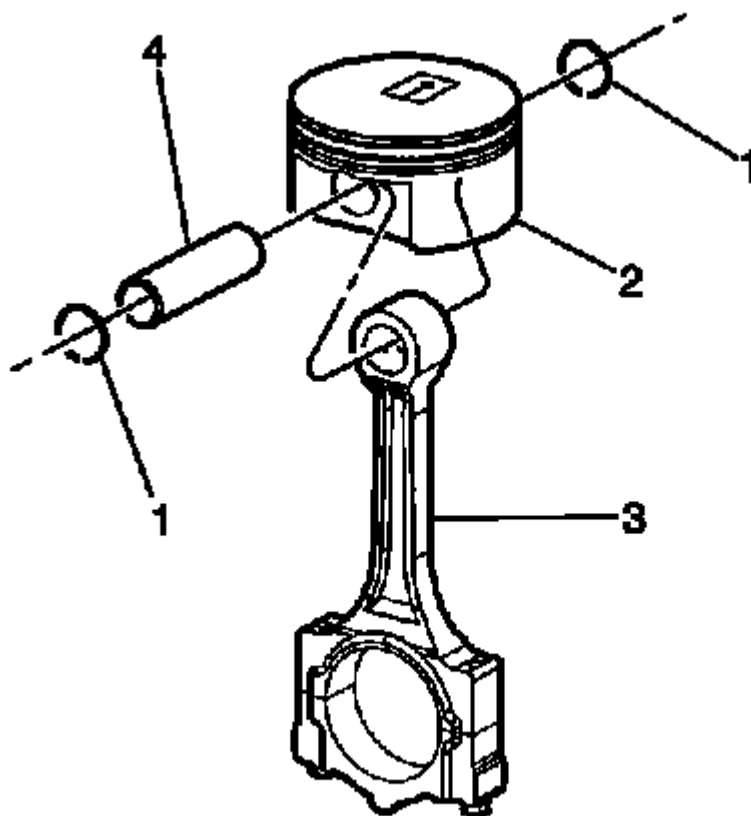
Exploded View Of Piston & Connecting Rod Assembly
